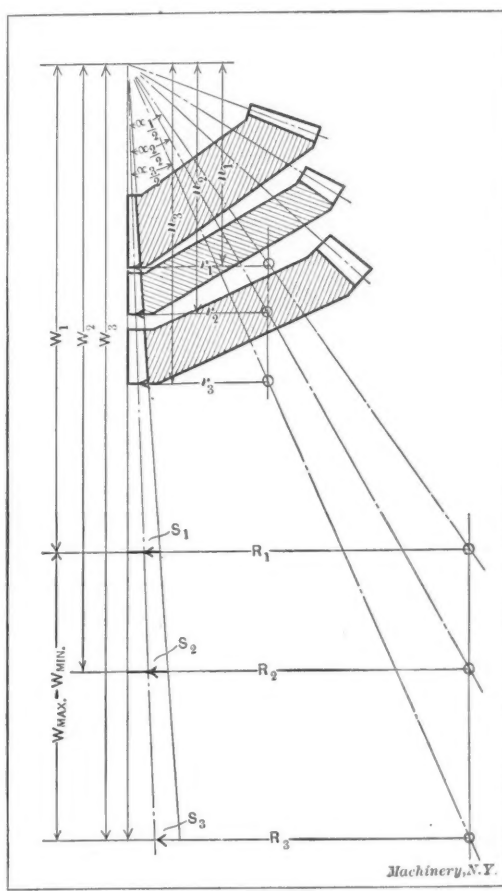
Diagram showing how Correct Bevel Gear Teeth can be cut with a Limited Number of Adjustable Formers
